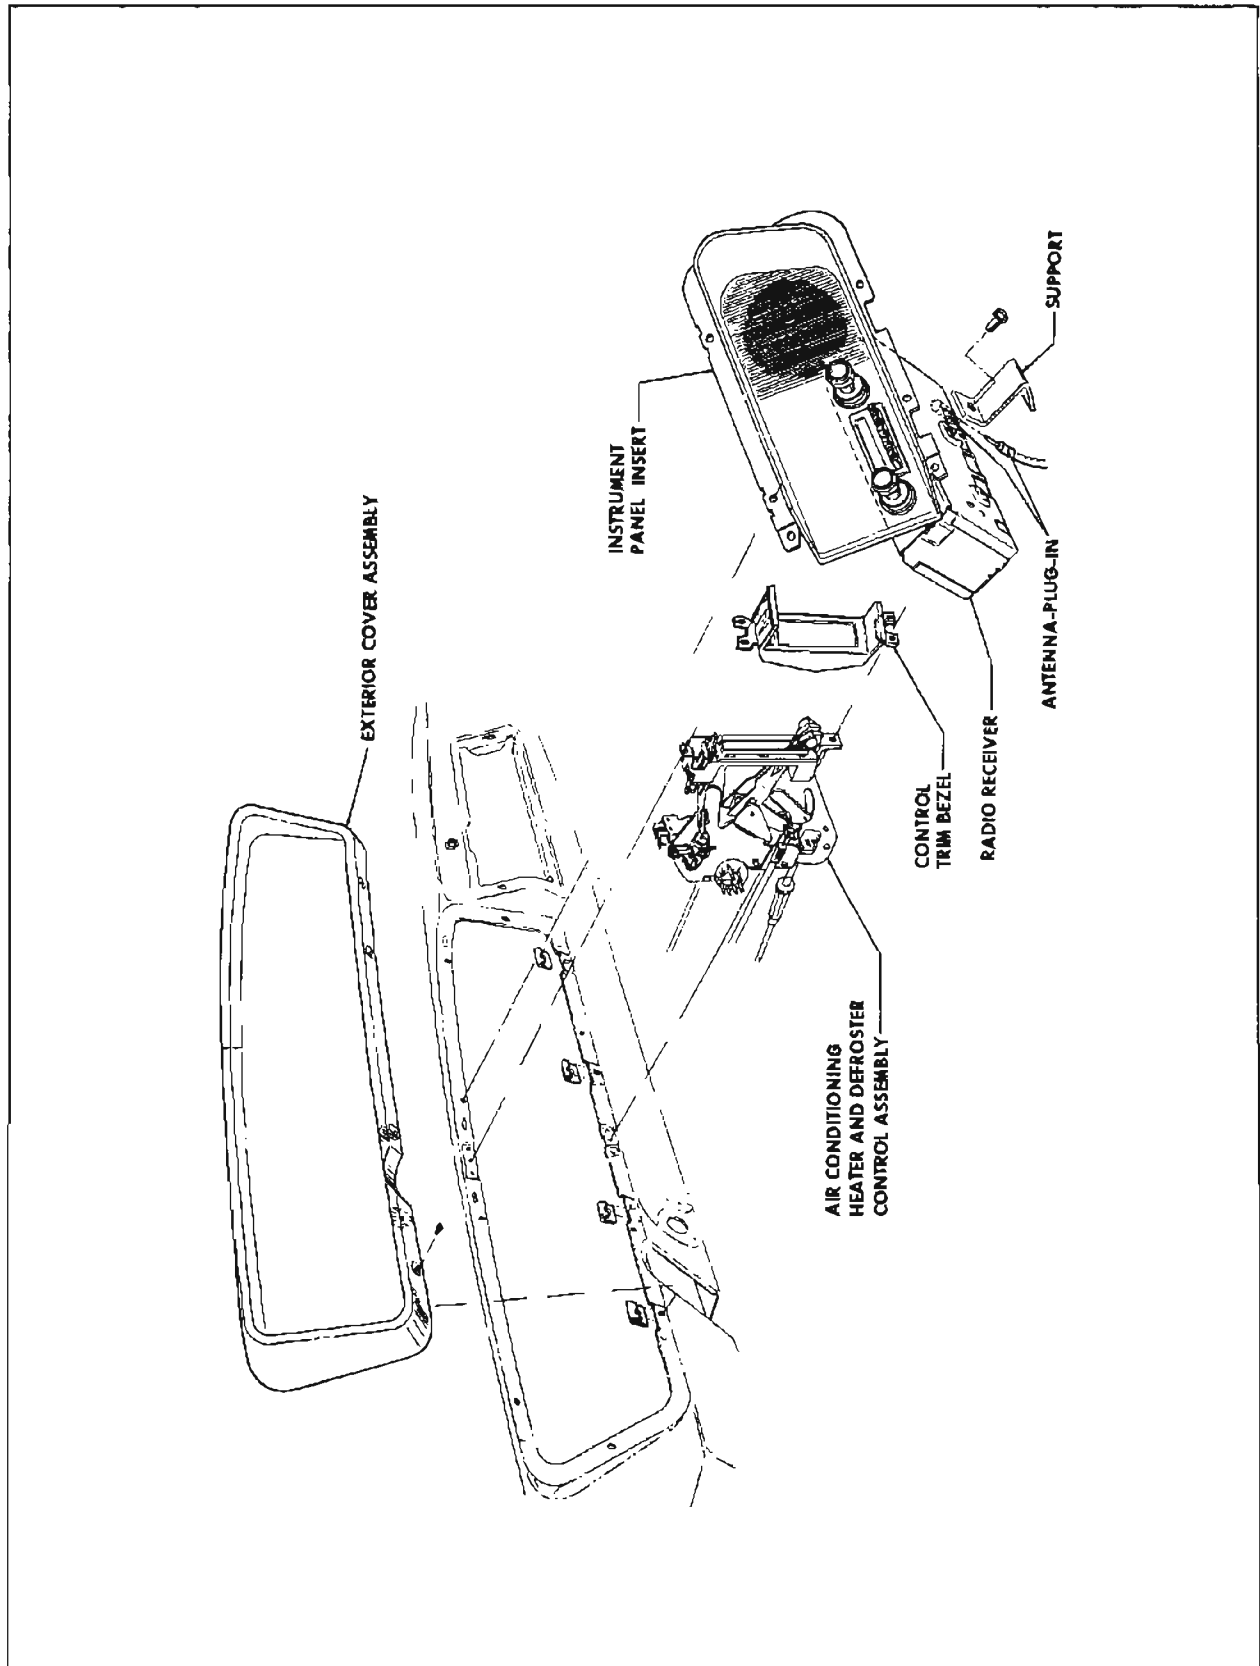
Air Conditioner Heater and Defroster Control Assembly Installation
